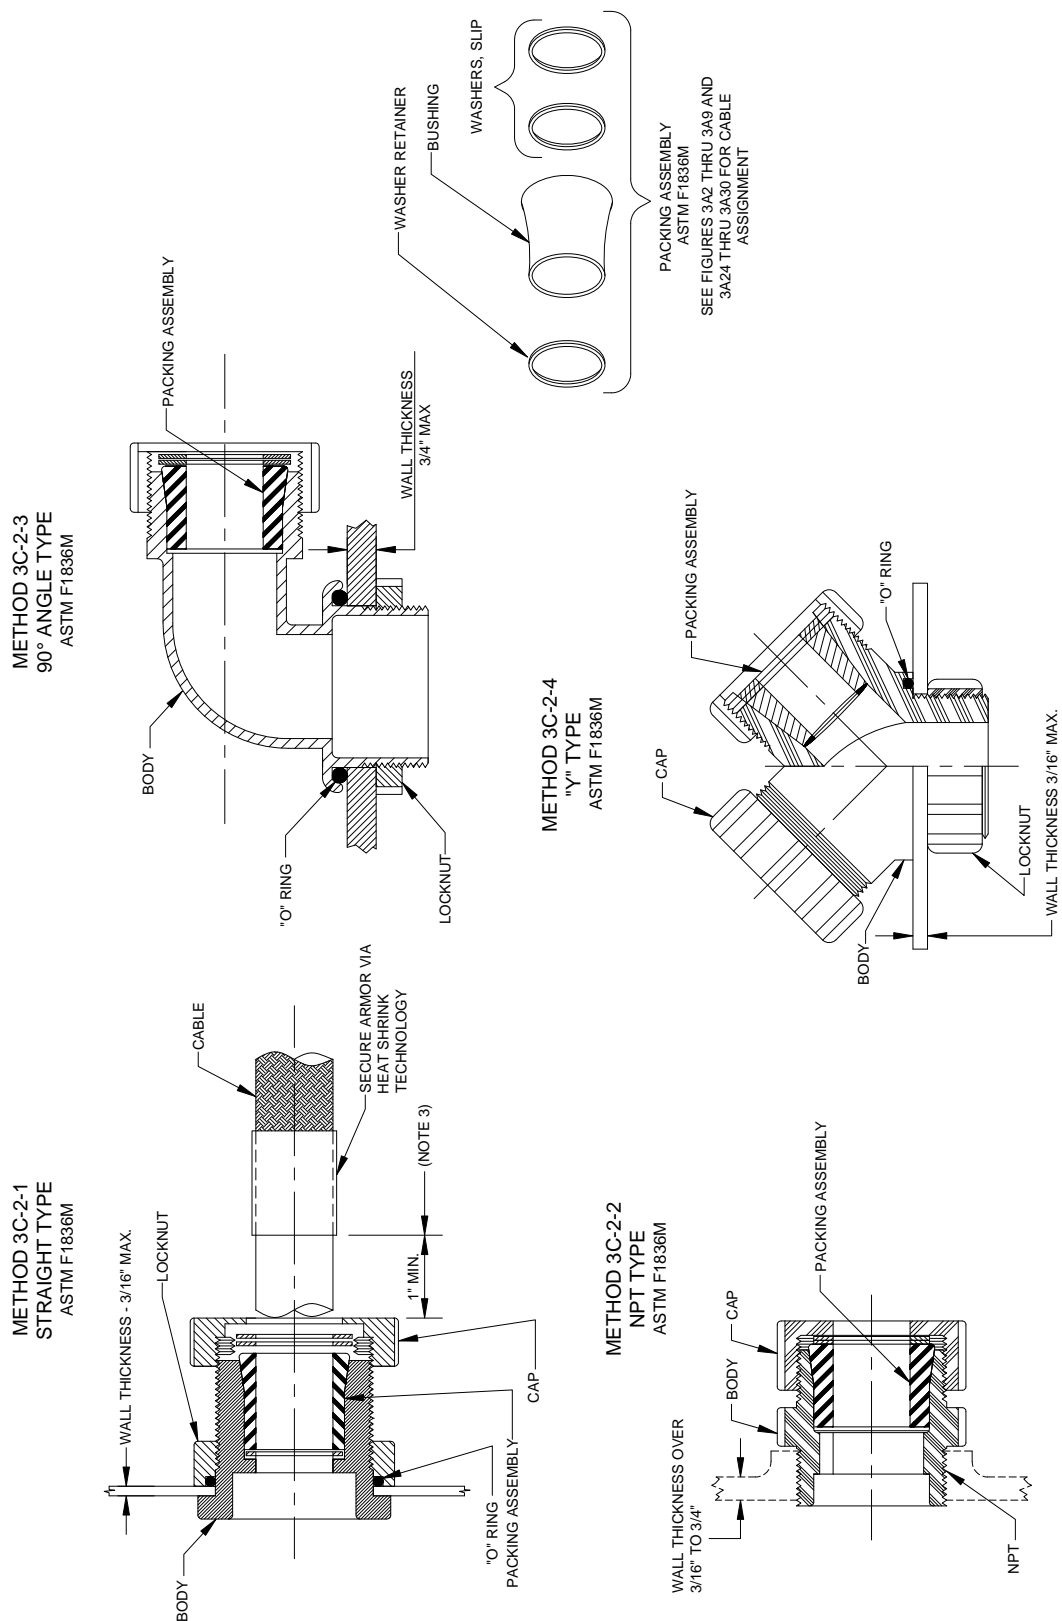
C2. ASTM F1836M nylon stuffing tube assembly.
